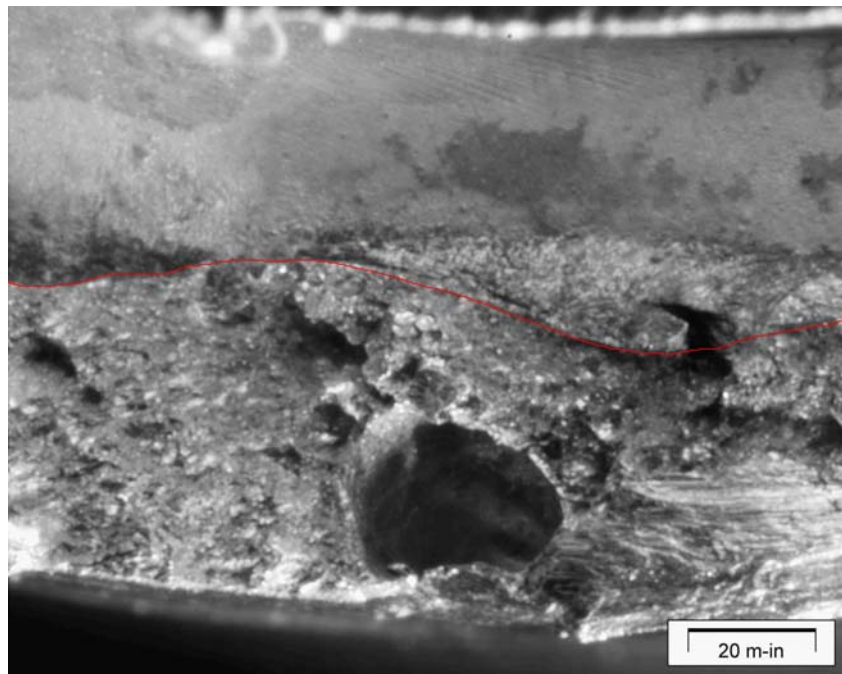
Elbow side fracture half depicting large gas void failure origin, from left side of figure 13.
